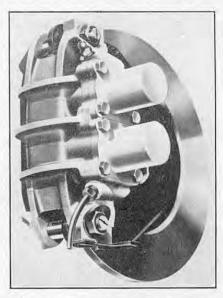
Hydraulic Disc Brake; LOCKHEED HYDRAULIC BRAKE Co., LTD.
